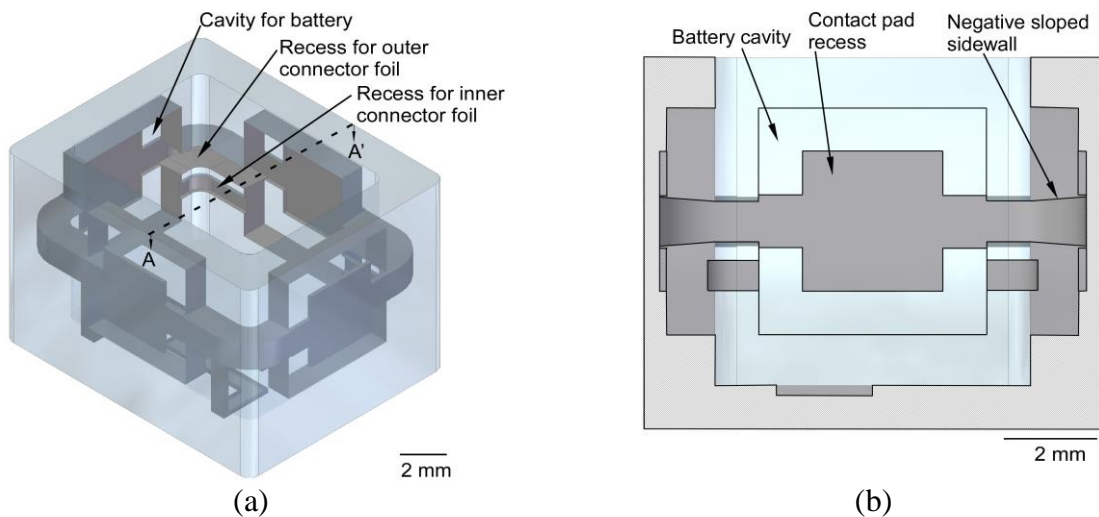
(a) Model of the 3D printed package shell; (b) cut-off view (AA') indicating the design features in the 3D printed package shell.
